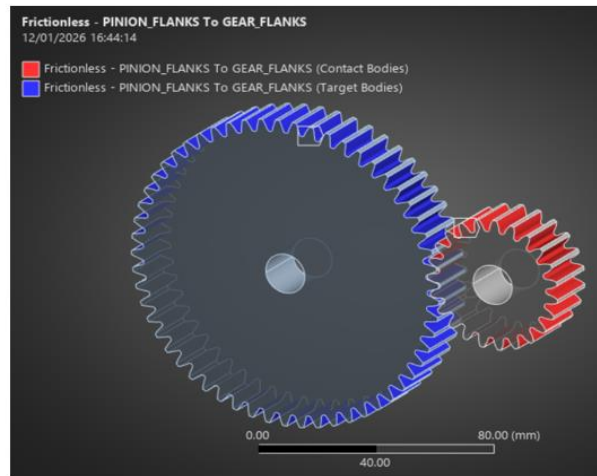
Definition of tooth-to-tooth contact in ANSYS Mechanical (frictionless, Augmented Lagrange).
